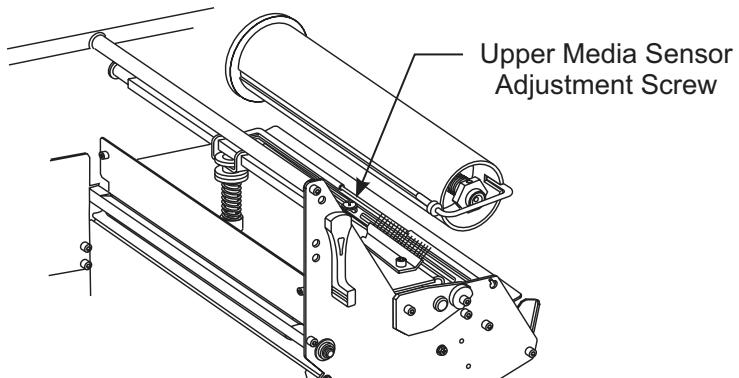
Upper Transmissive Media Sensor Position Adjustment
